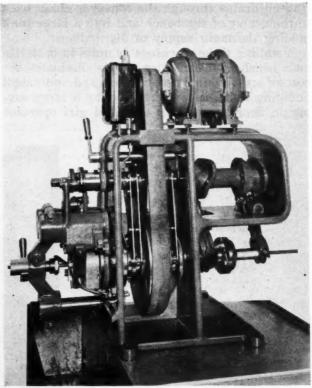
Right Side View of Screw Machine Shown in Fig. 2
